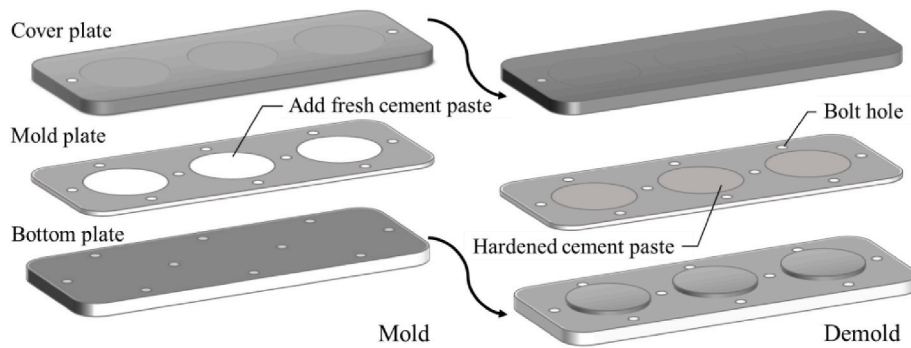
Diagram of the purpose-built mold for preparing disc samples.
